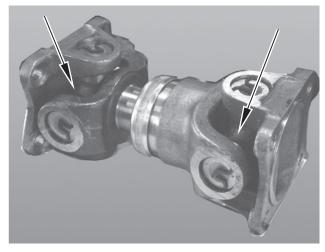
Drive Shaft Universal Joint Grease Fittings
